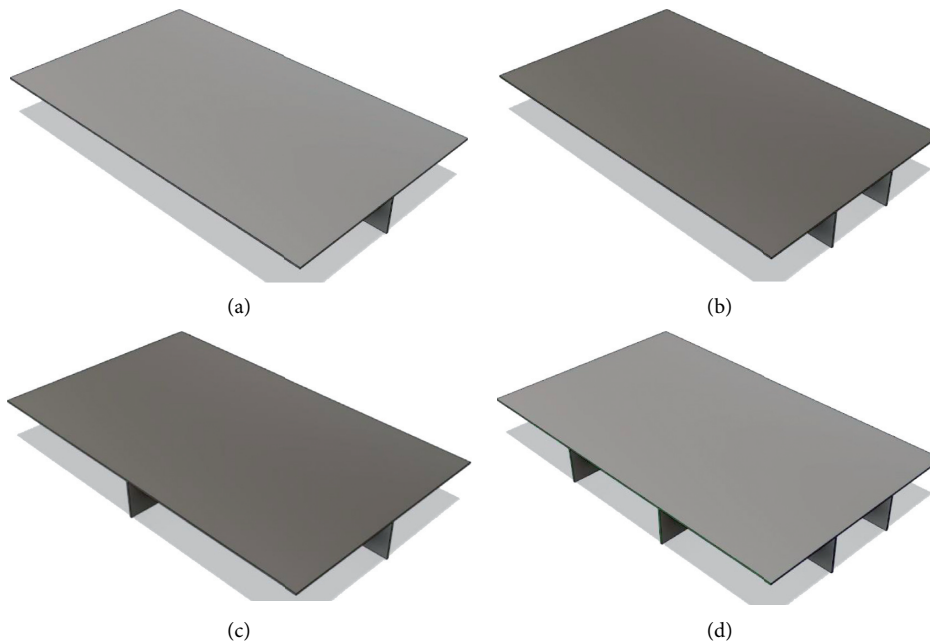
Isometric 3D view of stiffener configuration models. (a) Plate with one longitudinal stiffener. (b) Plate with two longitudinal stiffeners. (c) Plate with two intersecting stiffeners. (d) Plate with four symmetrically intersecting stiffeners.
